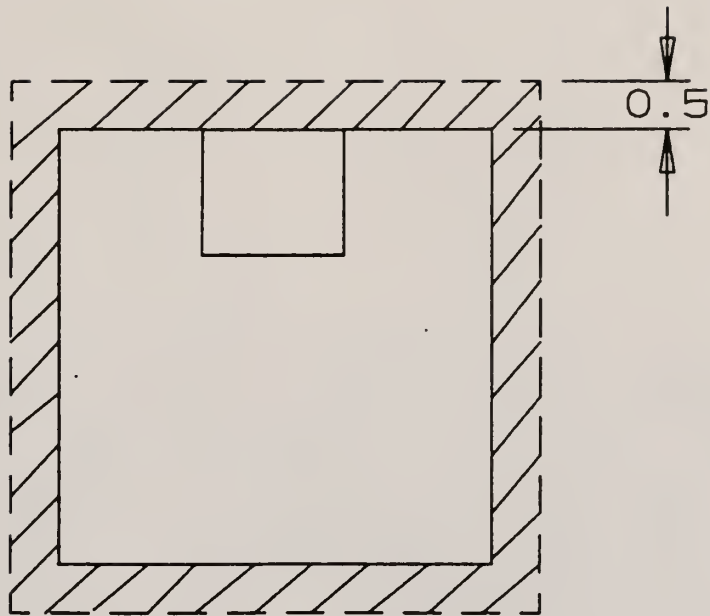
EXAMPLE 2 - SPECIFYING BLANK
